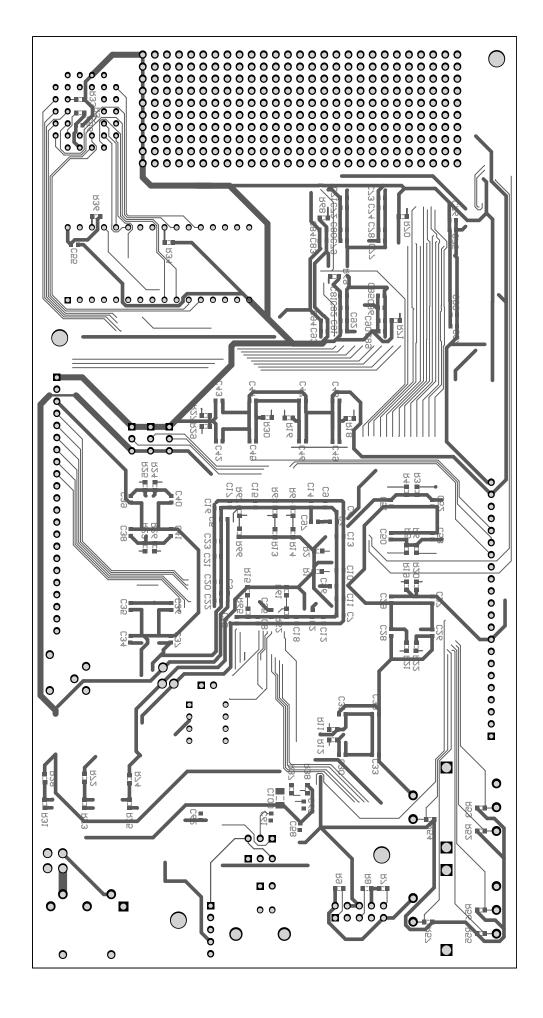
Back side of the original revision of the system's Printed Circuit Board (PCB).
